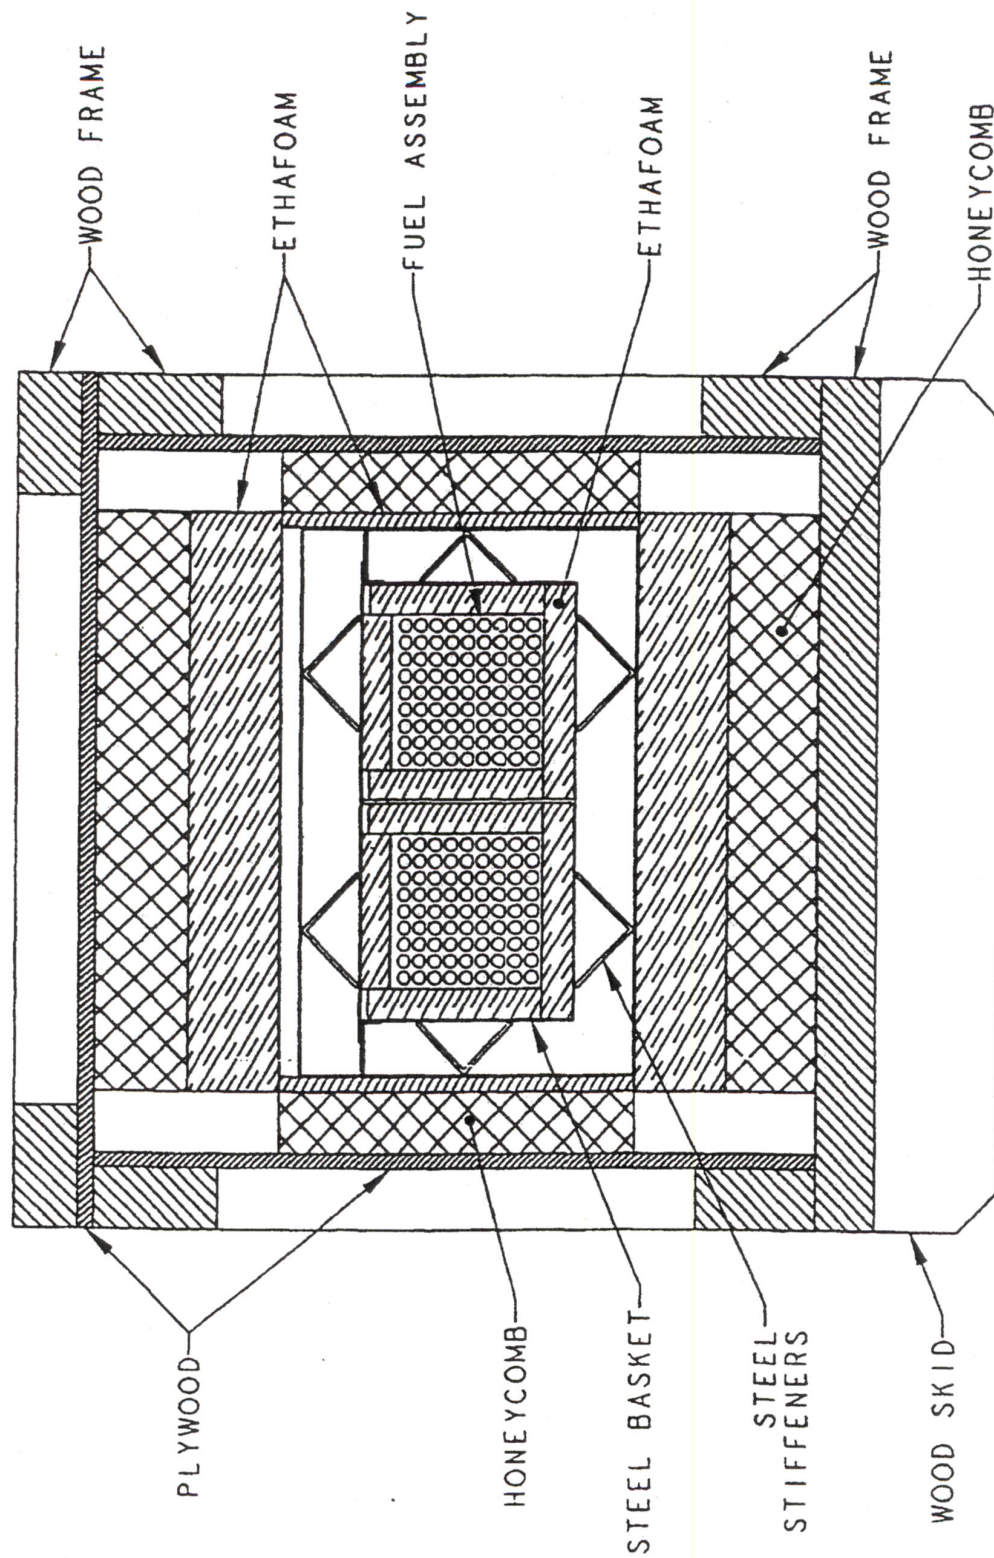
Sketch of an alternative unirradiated fuel package
